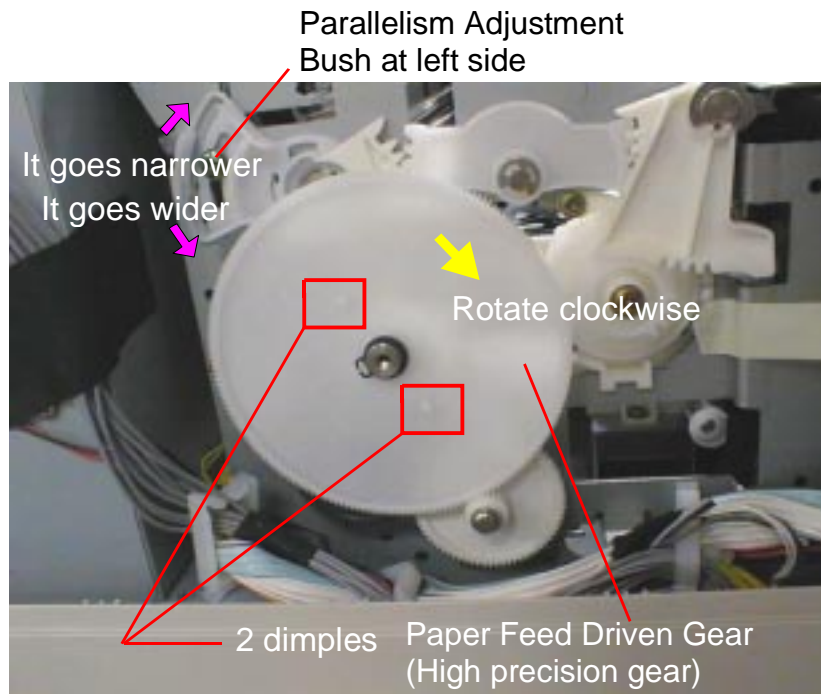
Rotational Direction of Paper Feed Driven Gear
